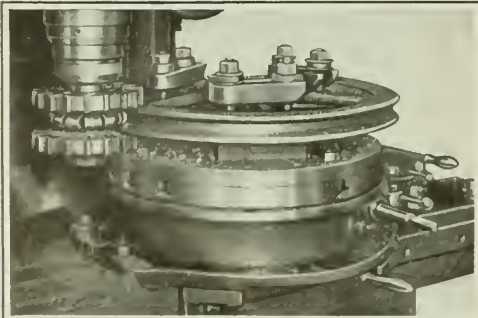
First of Three Set-ups for machining a Crane Sheave
